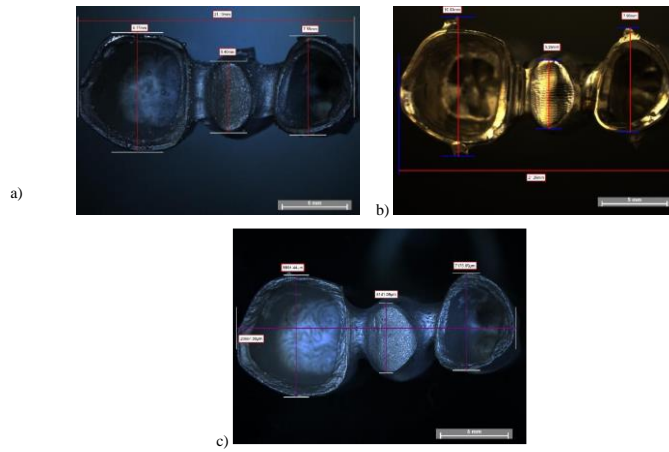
Macroscopic image representing the dimensional analysis of experimental samples obtained by: a) classical casting; b) milling; c) selective laser melting – superior view
